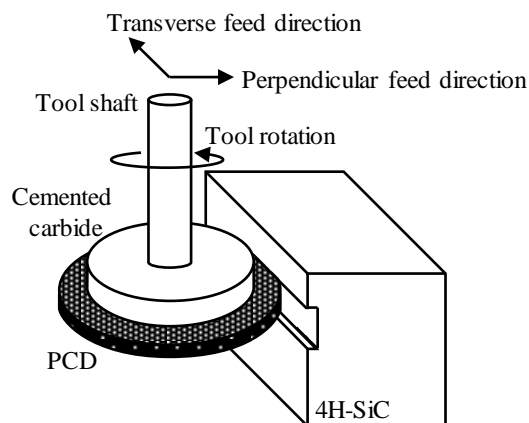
Schematic of the hybrid machining process using a disc-type PCD tool
